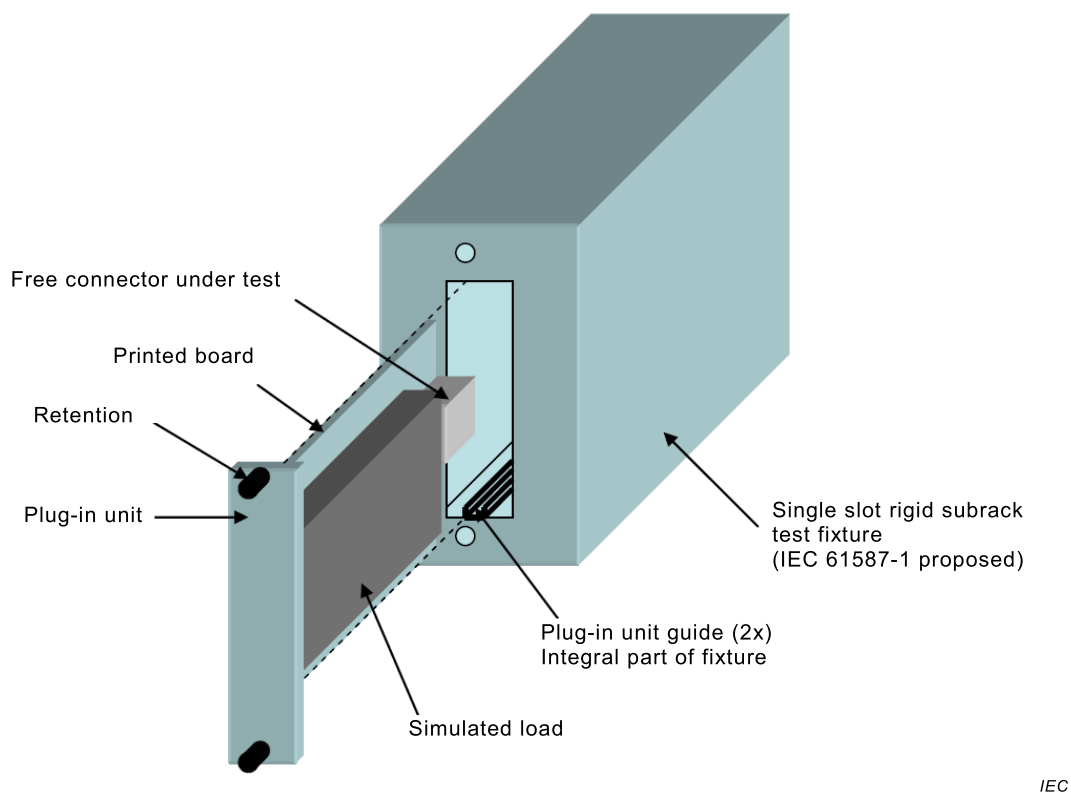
Test setups for vibration and shock tests – with mass loading
